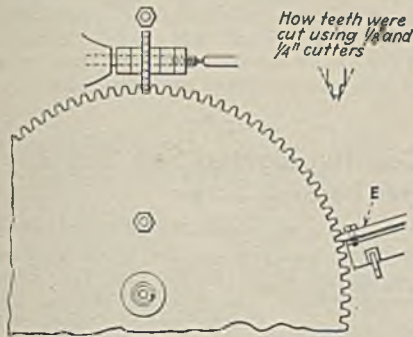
Sketch of method of holding gear in position for cutting new teeth (Stop E is placed with 1/8-in. cutter at bottom of good teeth)
